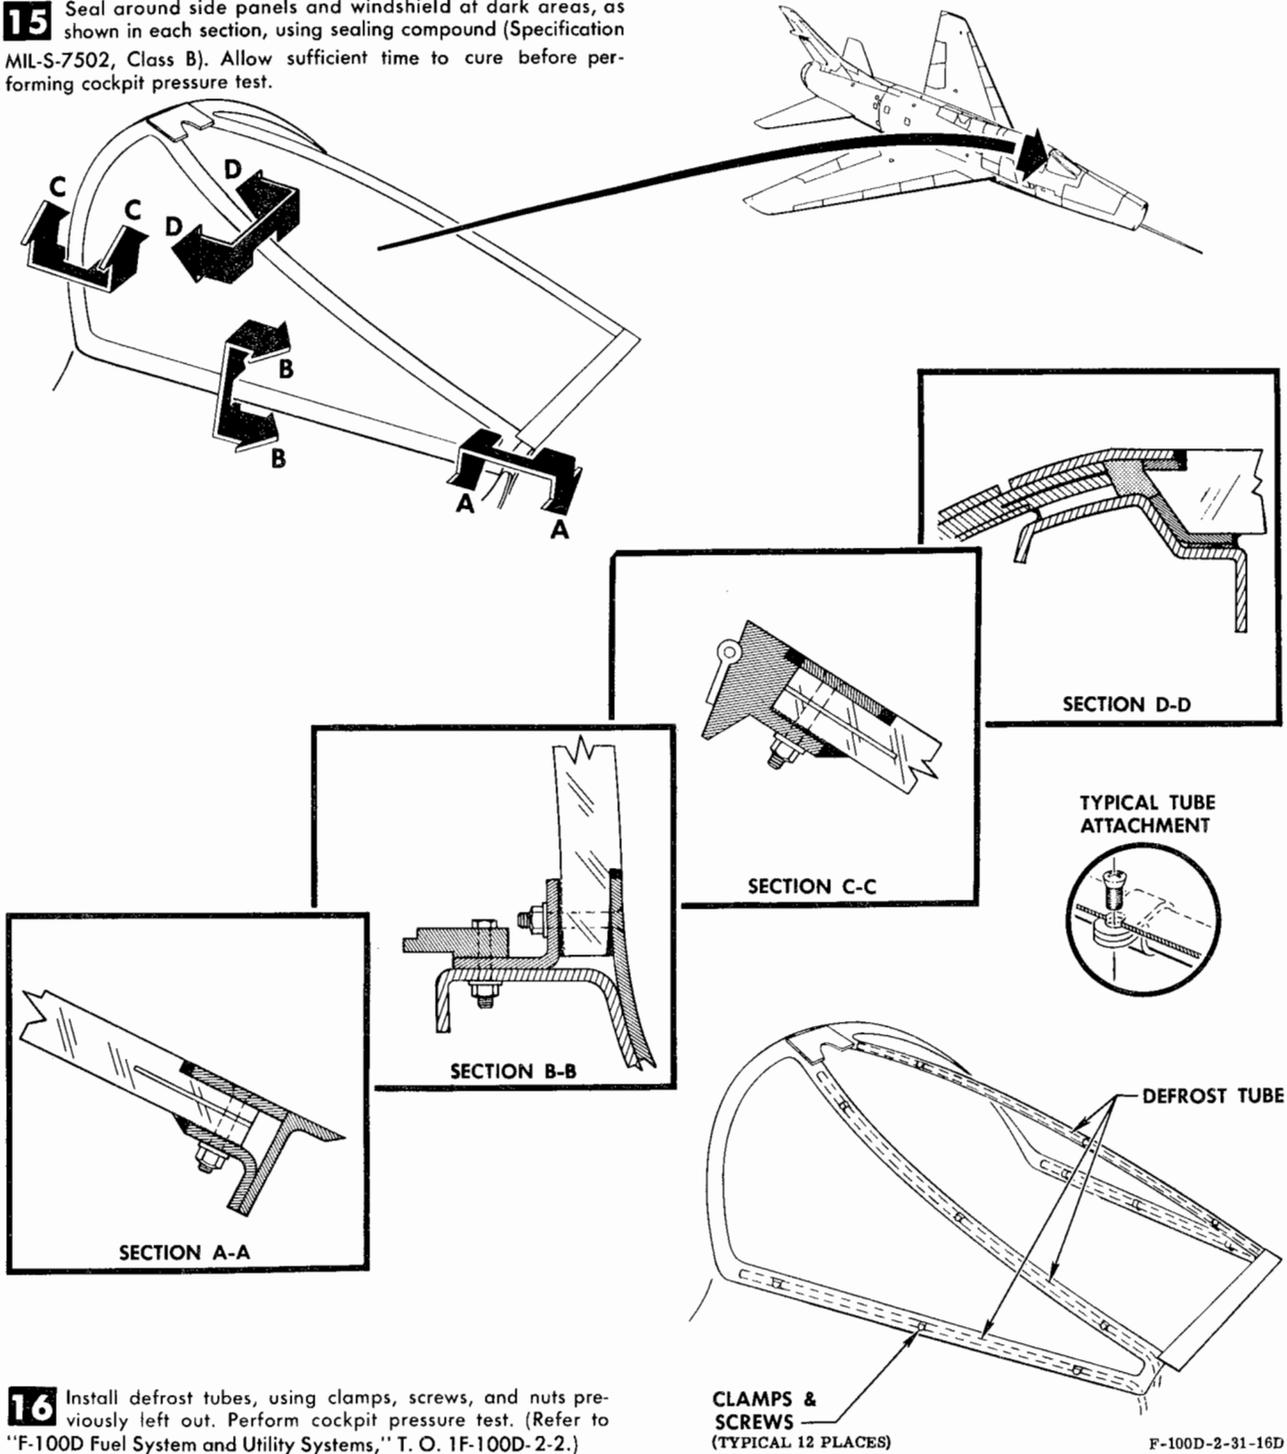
Installing Windshield Front or Side Panels (Sheet 2 of 3)
